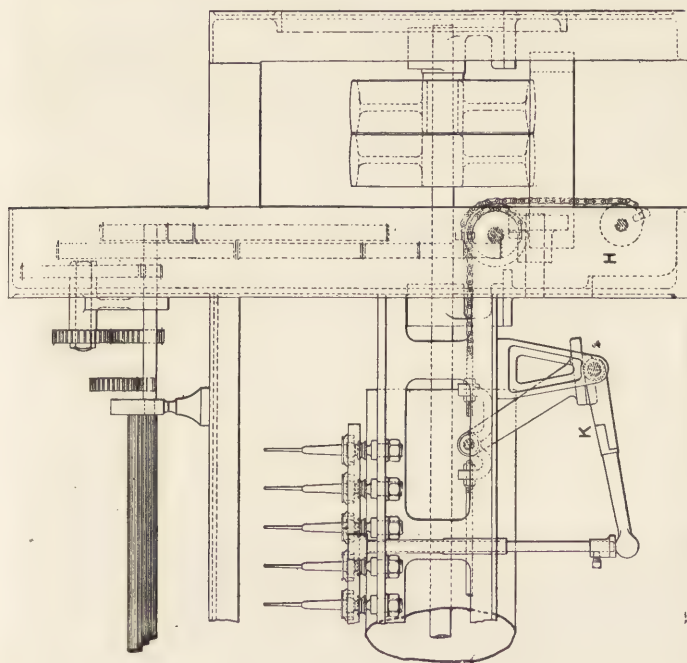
LONGITUDINAL VIEW OF RING SPINNING FRAME.
